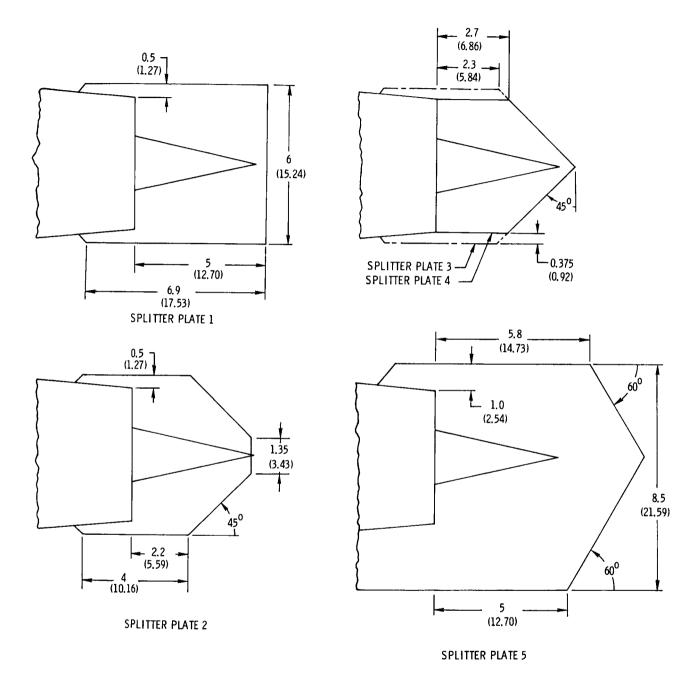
Dimensional drawings of mounted splitter plates. All dimensions in inches (dimensions in parenthesis in centimeters).
